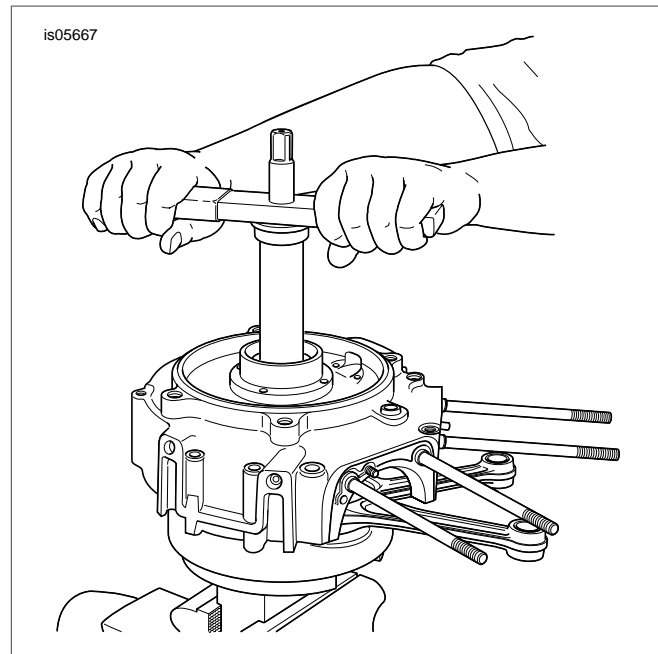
Press Outer Bearing Cone to Sprocket Shaft
